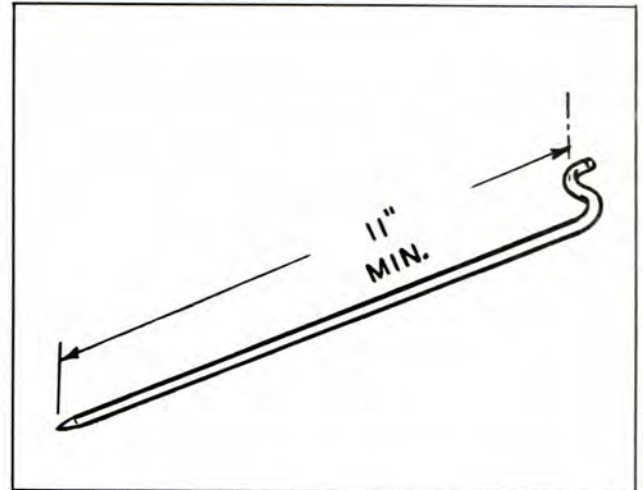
Typical Pusher Rod - Tool # 0-3 (Used only in connection with type "T" Chatillon Spring Tension Gage).
